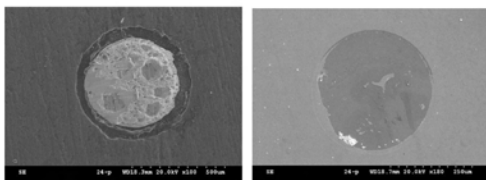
Fractured surface after shear test on PCB and BGA
